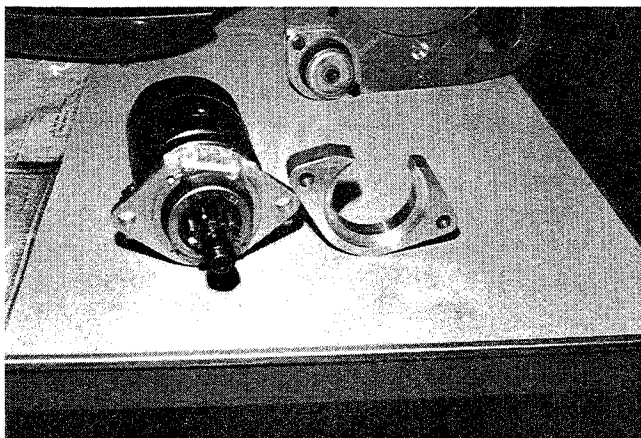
Starter mounting flange and spacer milled to clear crankcase boss
